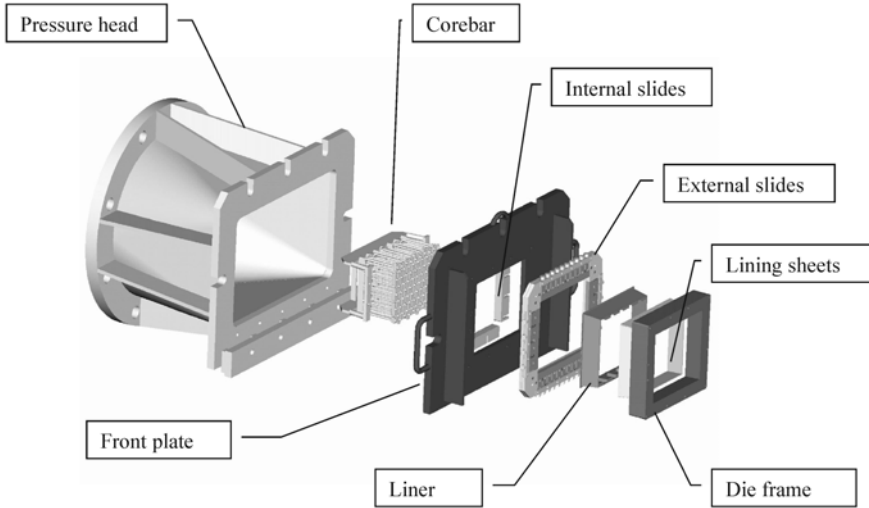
Standard combination pressure head and die assembly for soft extrusion
